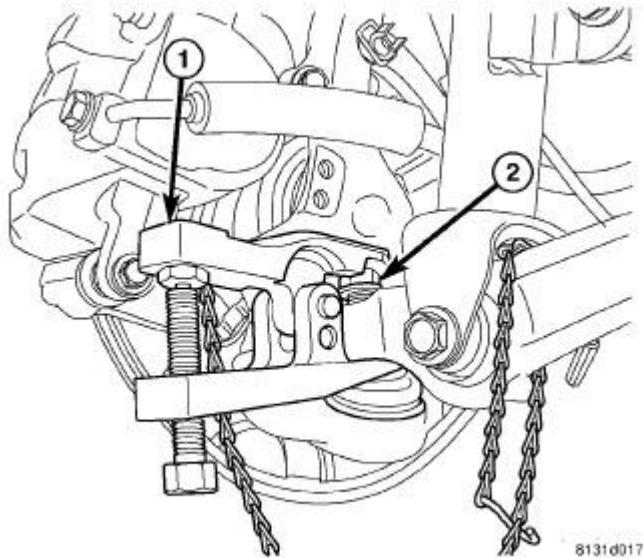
USING PULLER ON LOWER CONTROL ARM BALL JOINT
